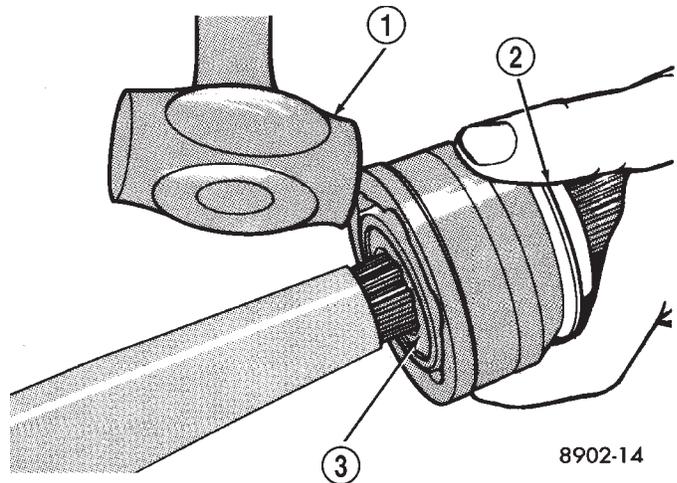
Outer C/V Joint Removal from Interconnecting Shaft
